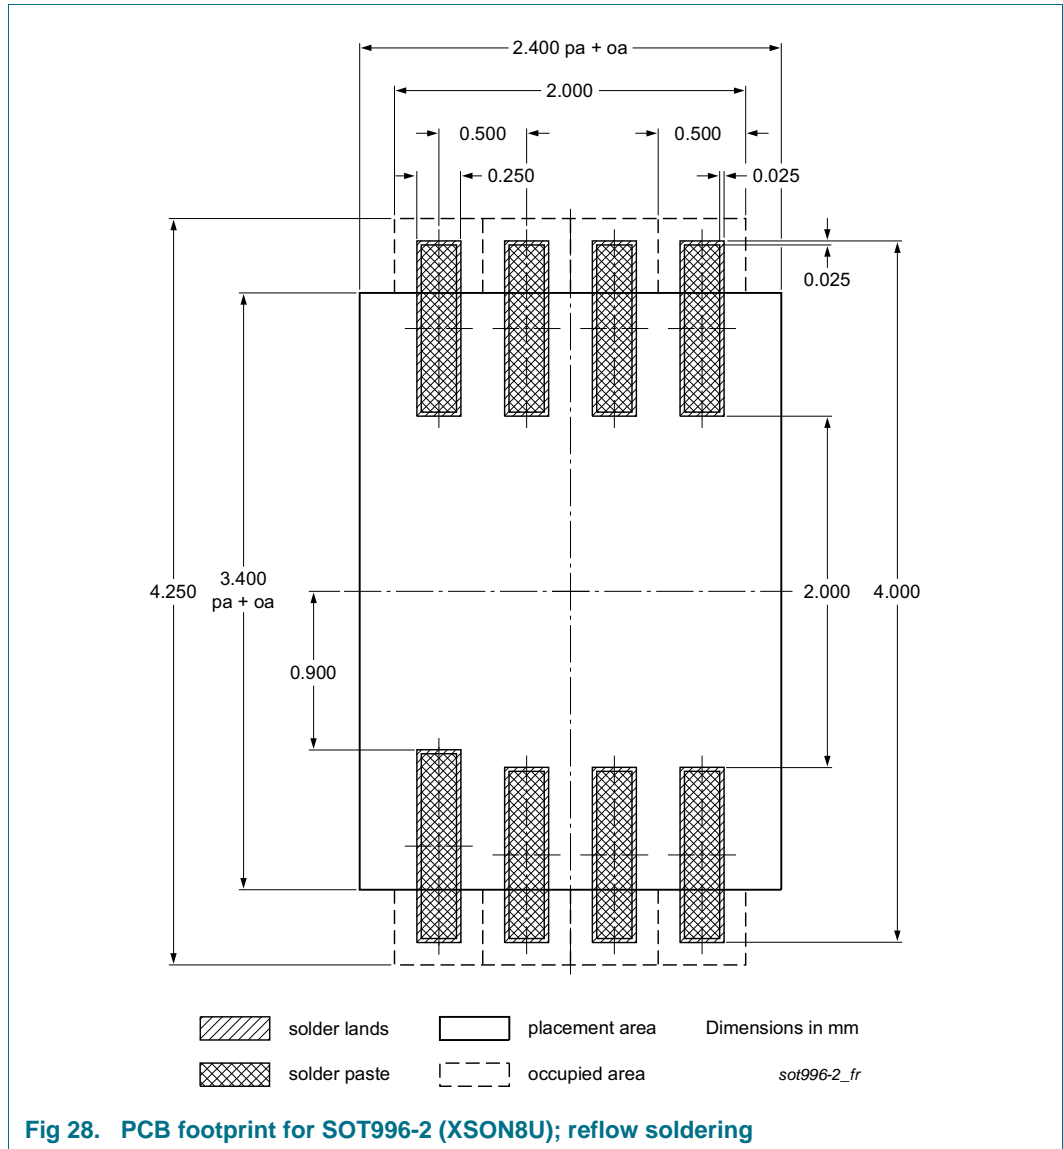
PCB footprint for SOT996-2 (XSON8U); reflow soldering
